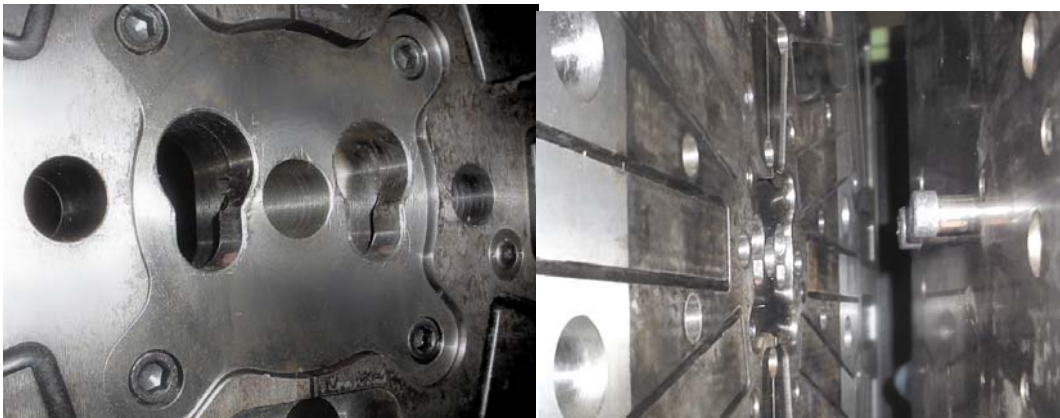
a+b: Optional mechanical safety features for non automated mould change systems : Holding pins on the injection mould and bayonet locks in the magnetic clamping platen.
